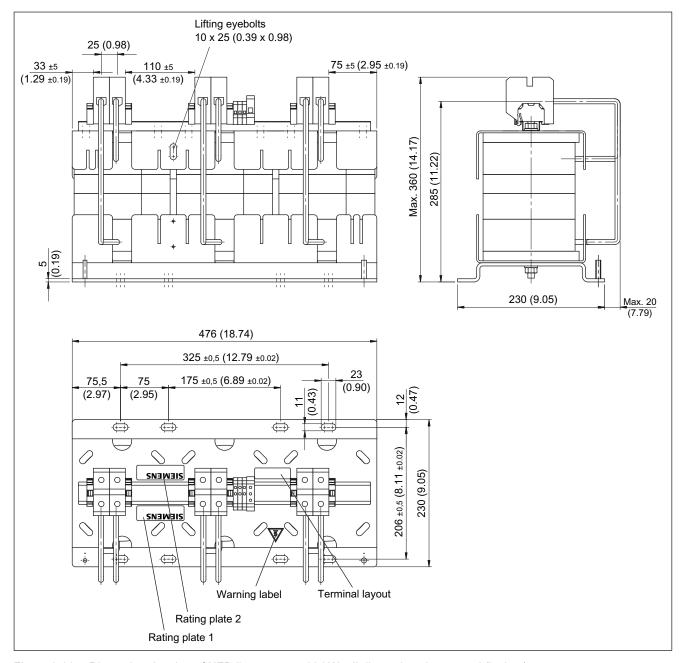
Dimension drawing of HFD line reactor 120 kW, all dimensions in mm and (inches)
